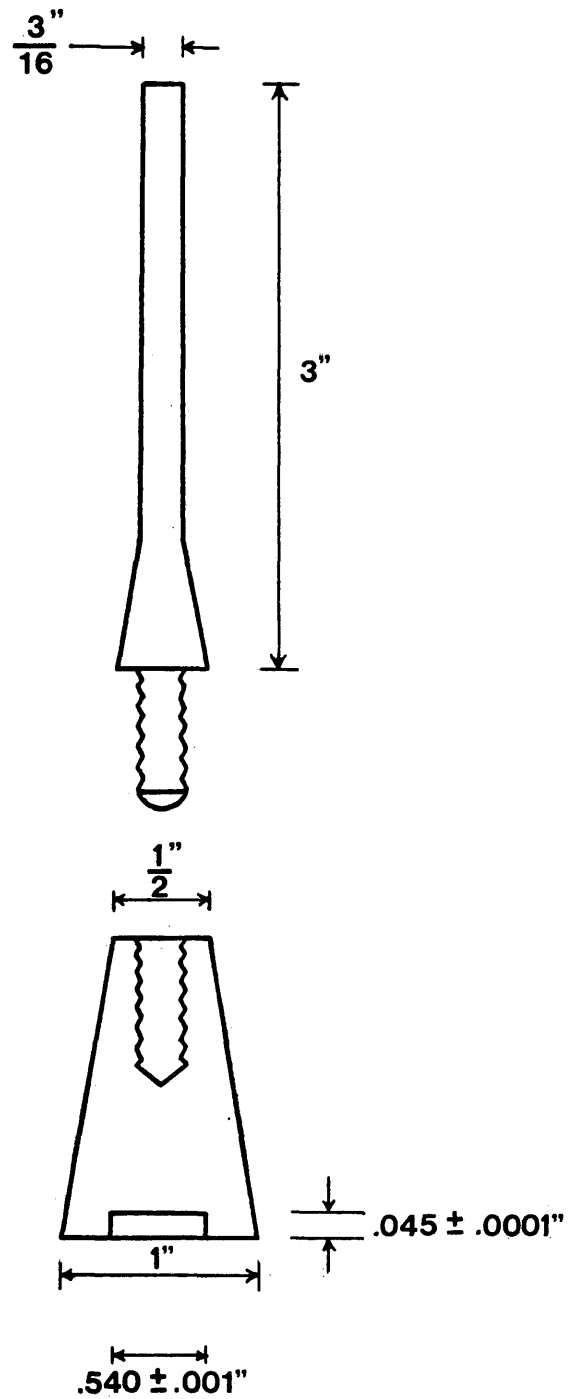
Disk holder sketch showing the two part assembly and the mean dimensions
